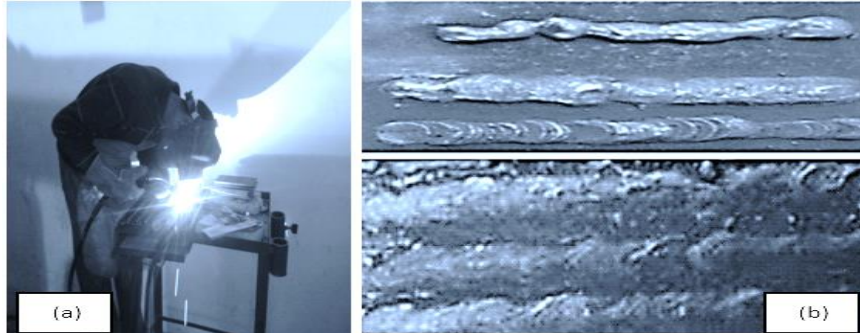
(a) workplace MIG welding process (b) Show welding line
